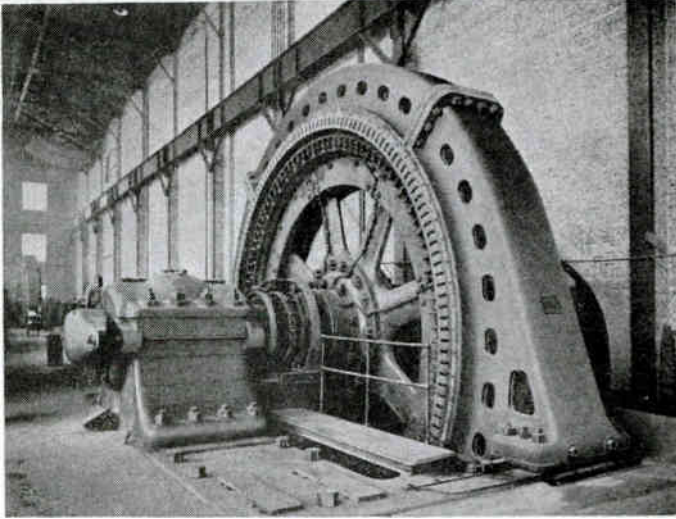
6000 H.P. Three-Phase Induction Motor. This motor drives three stands of rolls, one of which takes three passes, and the other two one pass each
